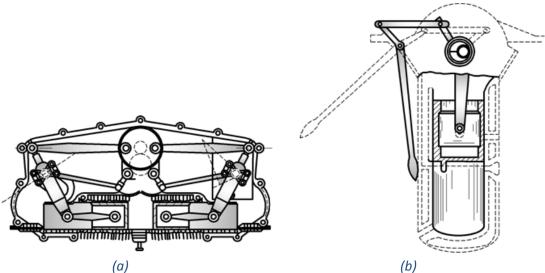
21 (a) VCR engine by changing the stroke length (b) Variman VCR engine using movement of crank shaft
